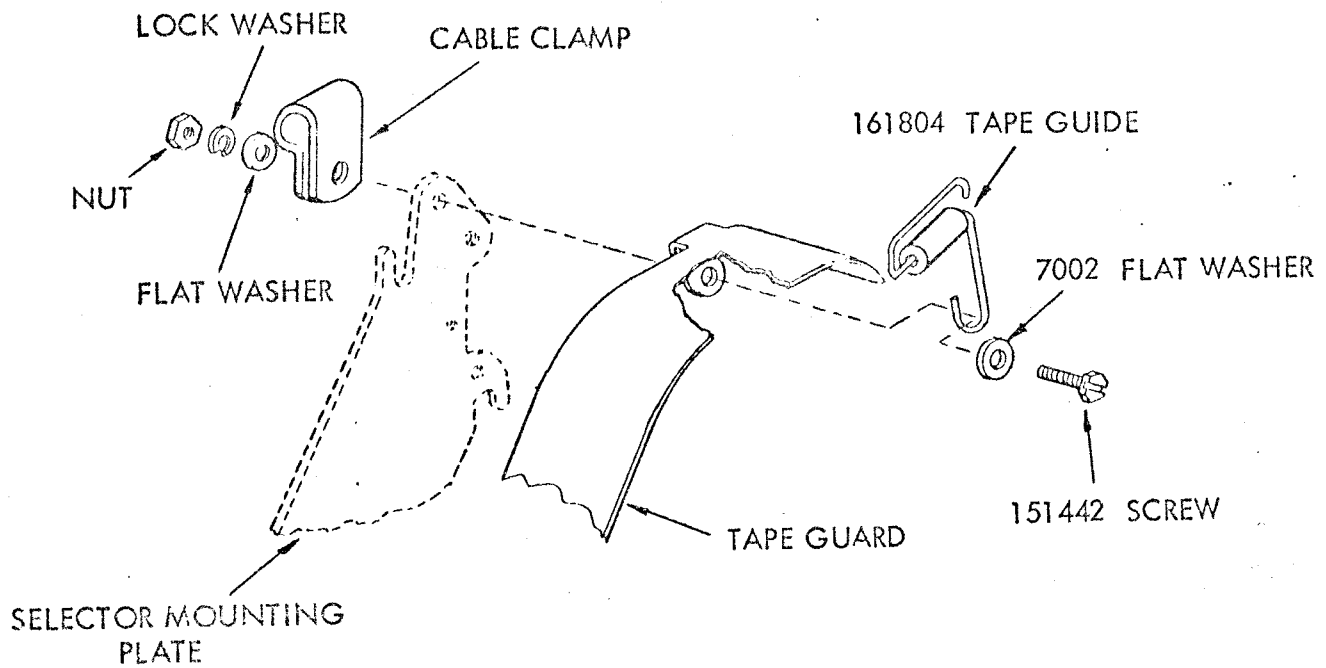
INSTALLATION OF 161804 TAPE GUIDE
